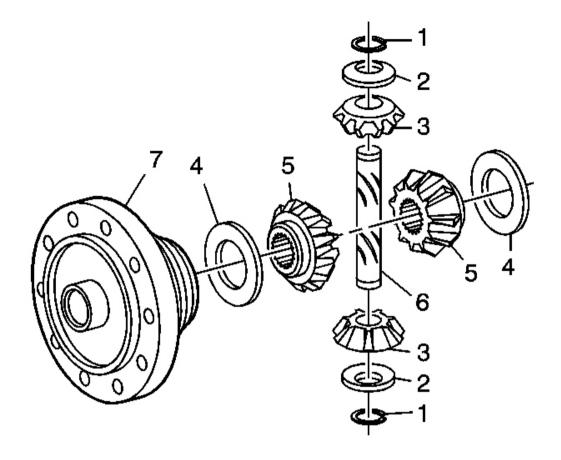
Differential Case & Components Courtesy of GENERAL MOTORS CORP.
